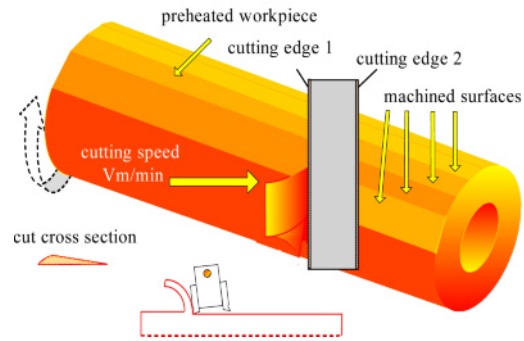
The scheme of planing with variable cutting edge for removing the defect layer with occluded sand from the outer surface of as-cast cylindrical billet in hot state
